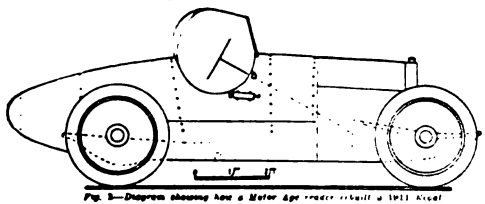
Diagram showing how a Motor Age reader chassis is a 1911 Model A
